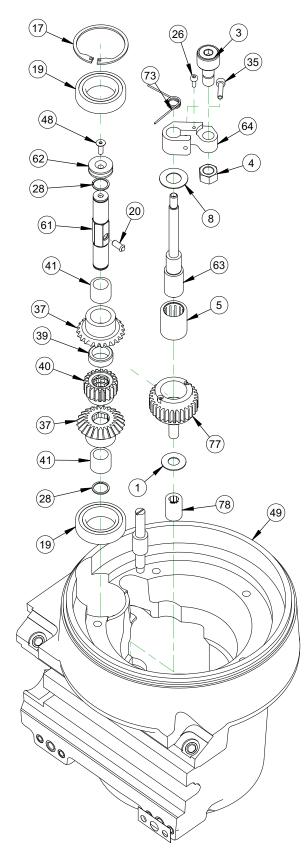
FF5300 ASSEMBLY 1 (P/N 89900)
